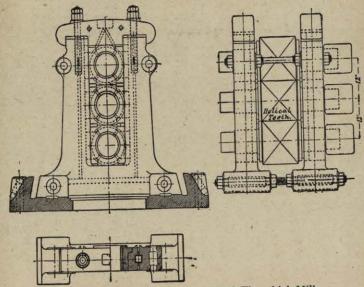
Pinion Housing for 12-inch Three-high Mill.
